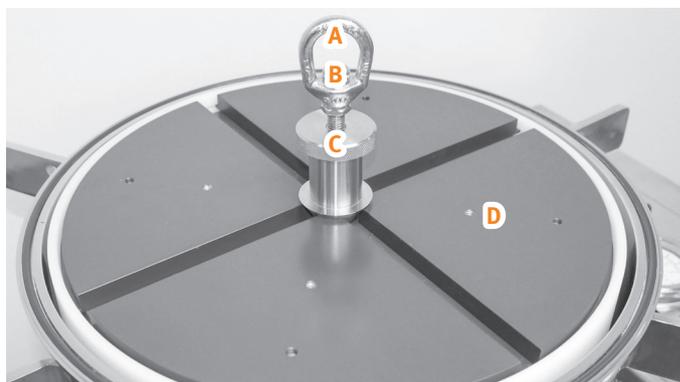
The cartridge tool. A = eyebolt, B = locking nut, C = knurled knob, and D = moveable plate (4).
